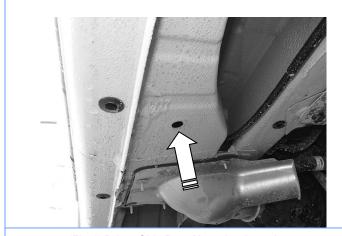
Driver Front Mounting Bracket (DFM) Installation
